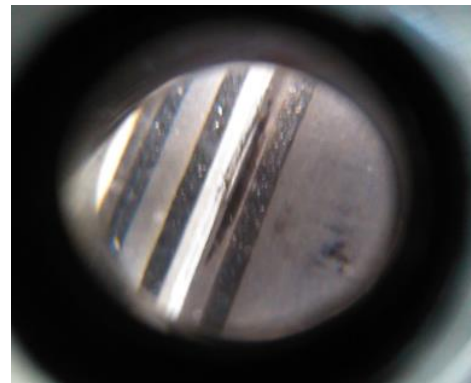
The cutting edge of the die-cut knife exhibited fine exfoliation [37].
